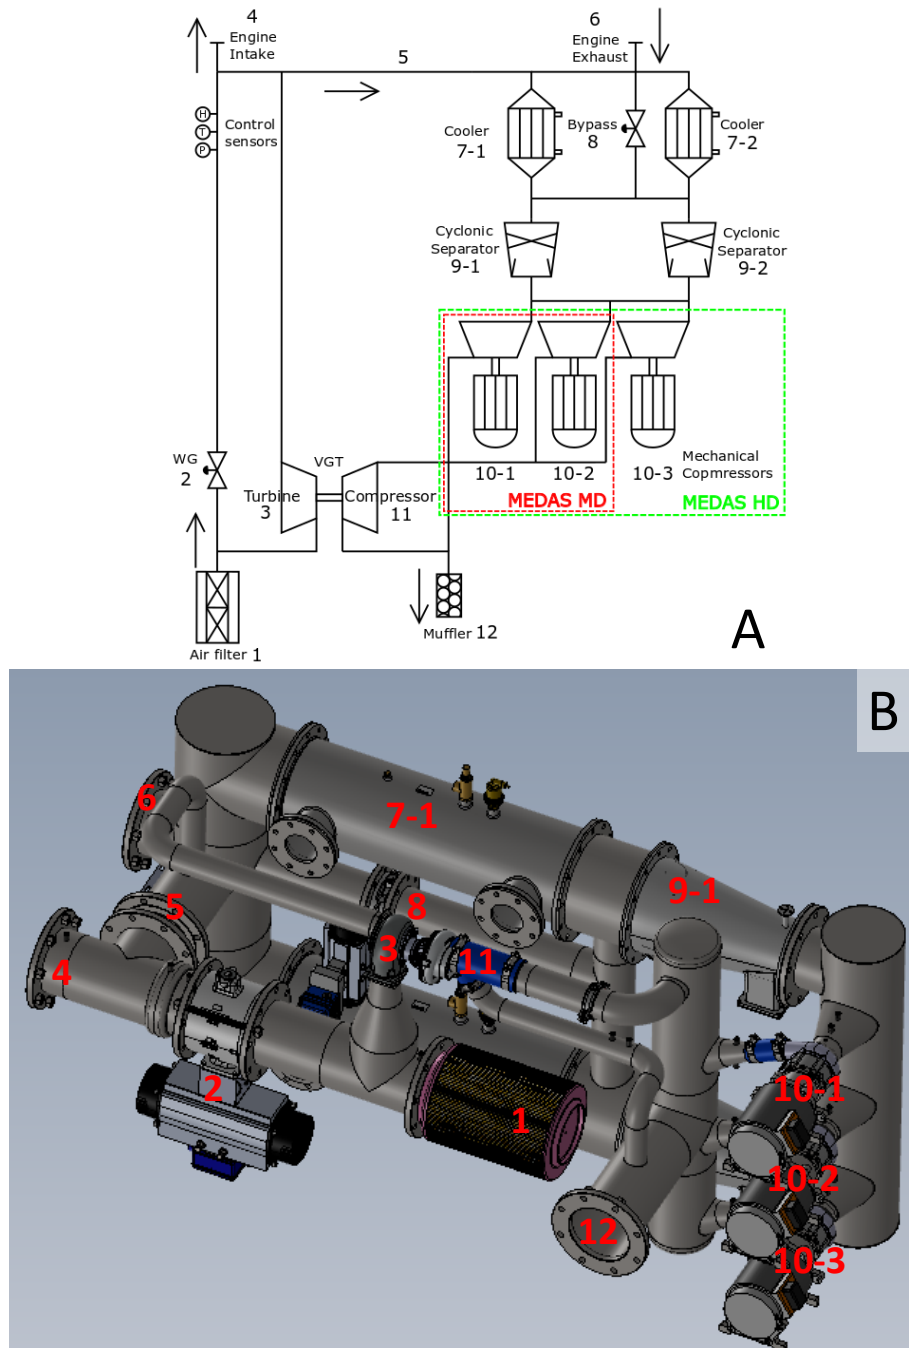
31. MEDAS HD and MD layout: (A) Layout outline; (B) Axonometric view of the 3D model
